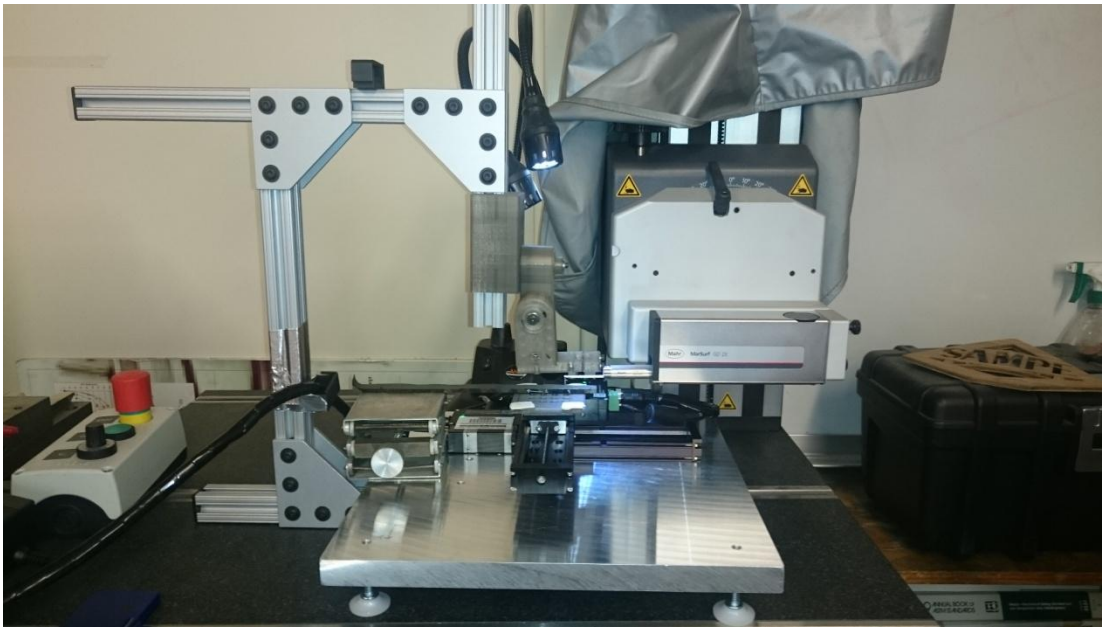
Surface roughness testing machine with automated moving base mounted
